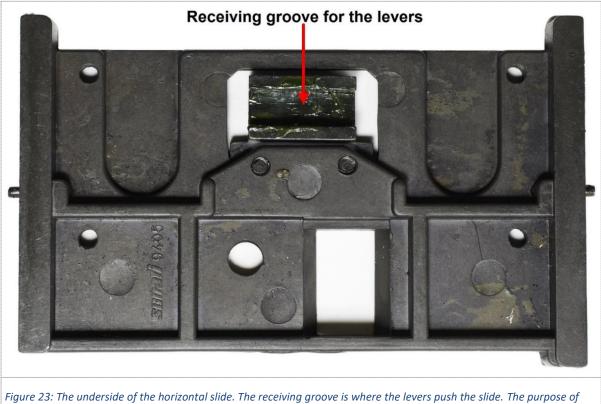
The underside of the horizontal slide. The receiving groove is where the levers push the slide. The purpose of the small pins on the sides of the slide is to keep the bearing retainers constrained within the bearings.
